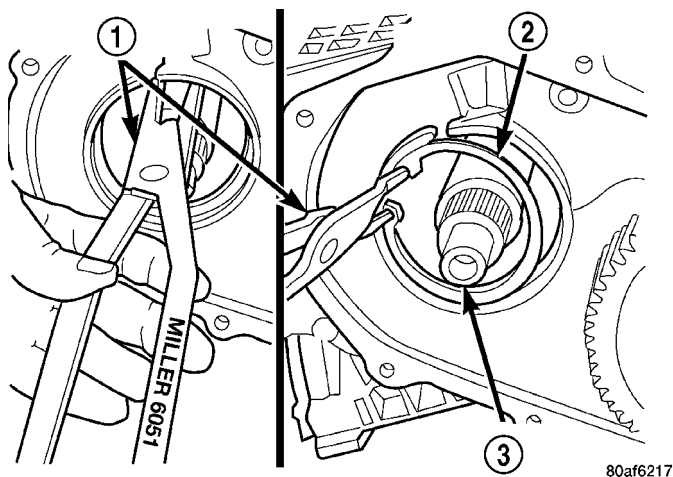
Remove Transfer Shaft Bearing Snap Ring
